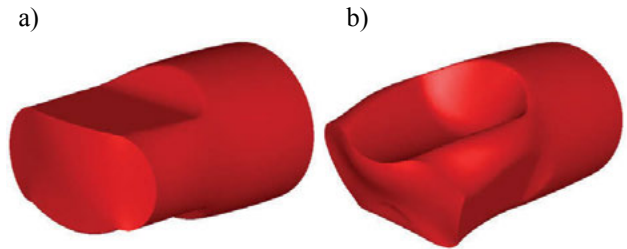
Shapes of the forgings after flattening: a) before changes and b) after tool shape optimization
